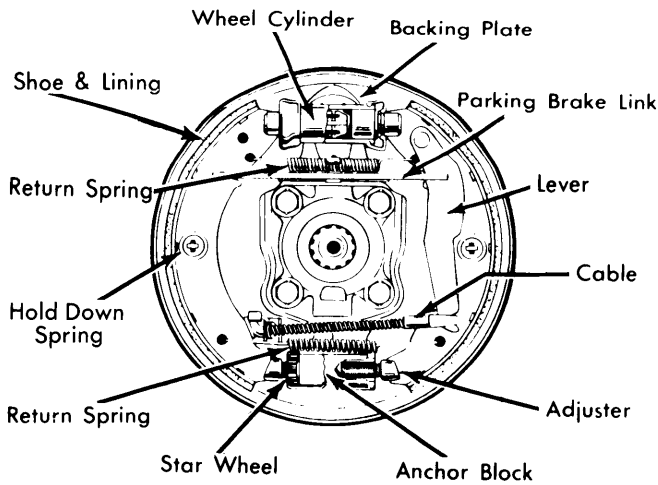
Volkswagen Type 2 Rear Brake Assembly with Brake Drum Removed
